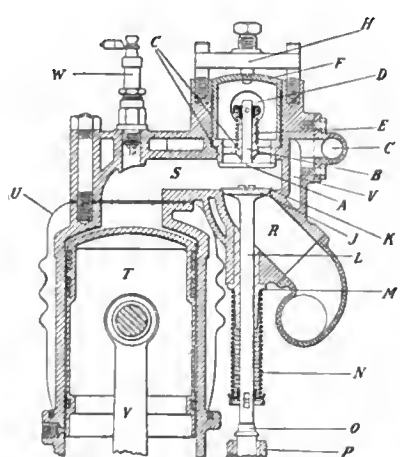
VERTICAL SECTION OF CYLINDER OF FOUR-CYCLE MOTOR WITH AUTOMATIC INLET VALVE.
